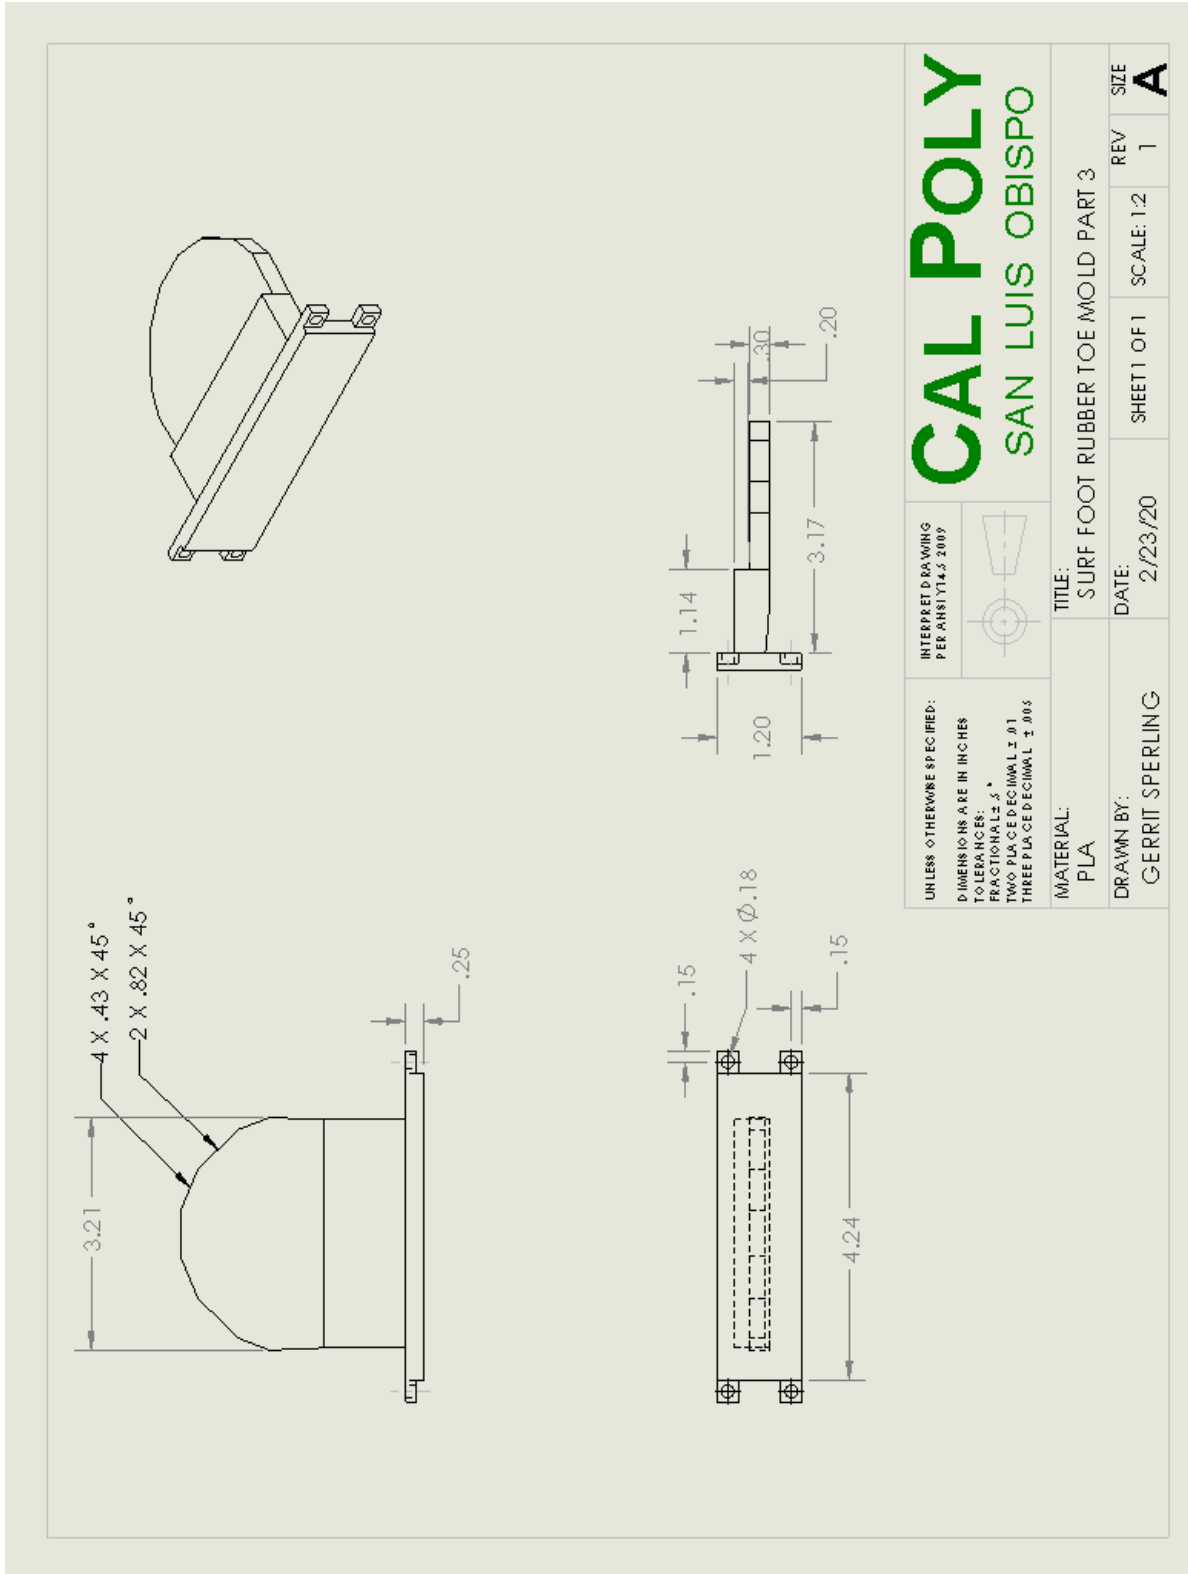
Detailed Drawing of Inner Mold for Rubber Toe
